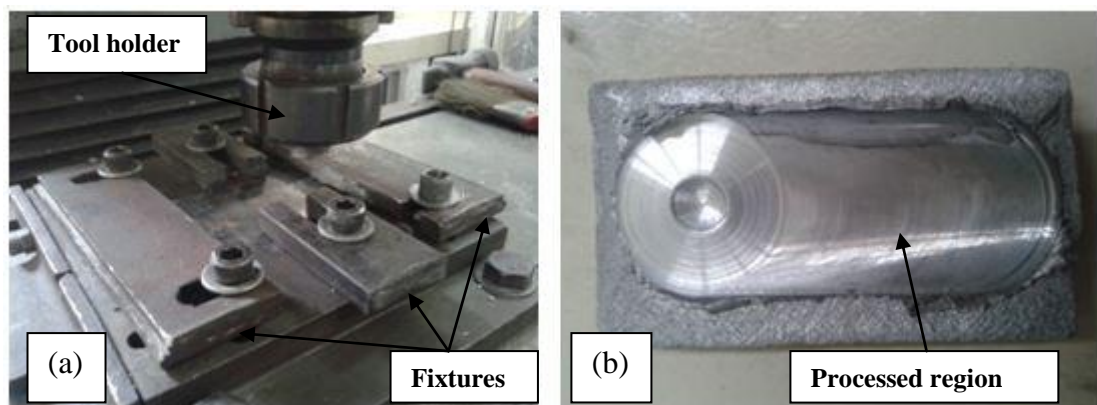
(a) Tool holder and fixture used during processing (b) A FSPed sample using process parameters as 1525rpm and 1 mm/min
